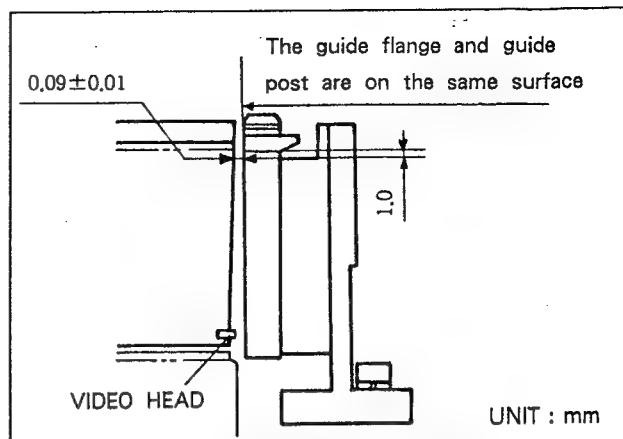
Position Relationship in Vicinity of Exit Slant Guide Assembly
